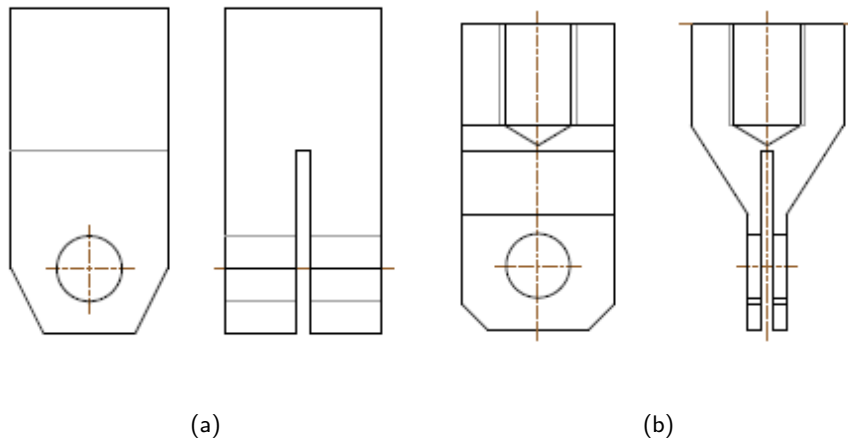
Original grip design (a) and modified grip with smaller pin contact patch (b).
